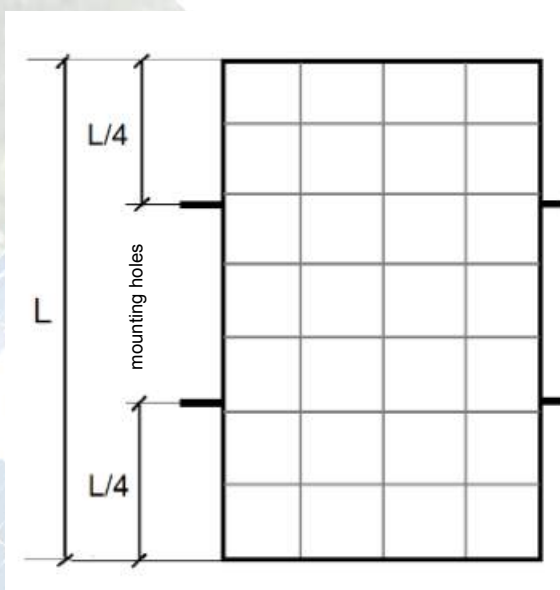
Proper mounting distances for modules operating vertically (mounting holes)
